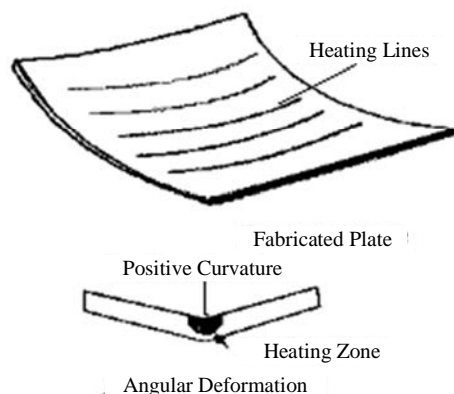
Flat plate and fabricated plate after bending in Line Heating Process [14]
